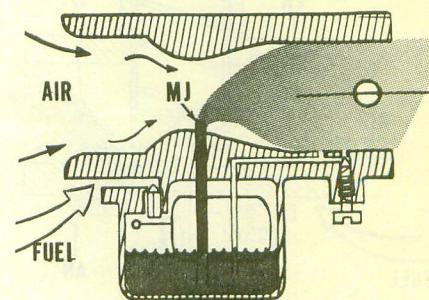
View of carburetor showing disc type throttle valve completely open for high speed operation.
